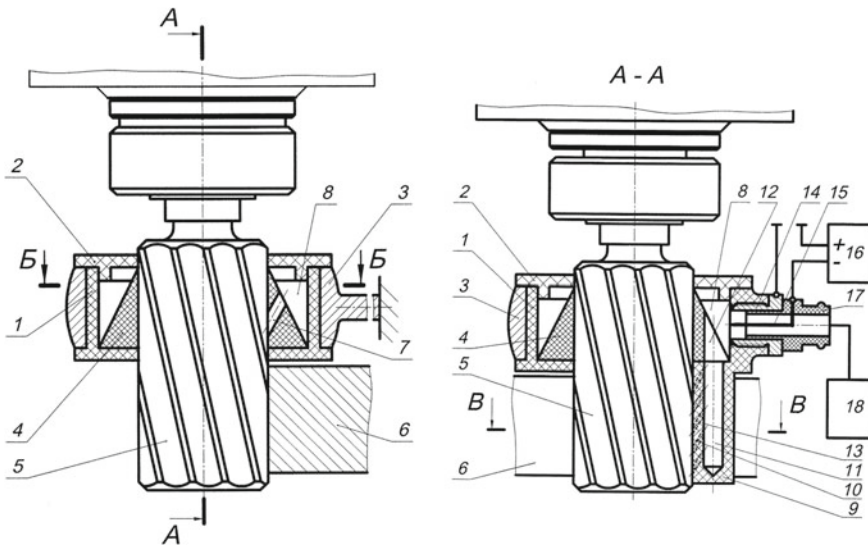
Device for cooling the cutting zone of the milling machine tool 1—case; 2—cover; 3—kronshane; 4—sleeve; 5—cutter; 6—workpiece; 7—channels; 8—annular chamber; 9—ledge; 10—the inner surface of the protrusion; 11—additional camera; 12—groove; 13—channels; 14—positive cylindrical electrode; 15—negative needle electrode; 16—power supply; 17—fitting; 18—source of compressed air
